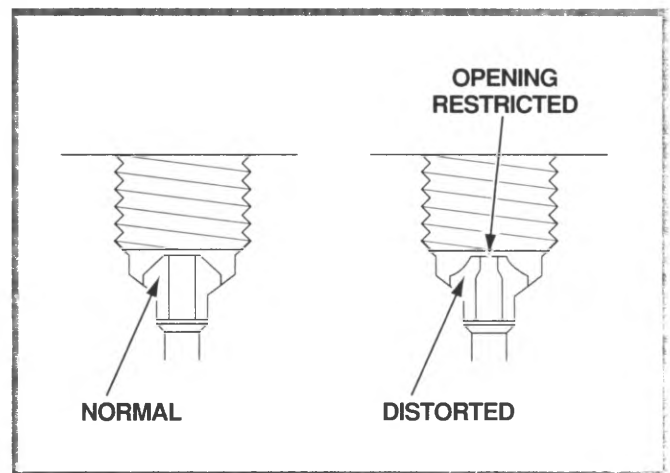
, Double Flare Fitting Distorted by Overtightening
